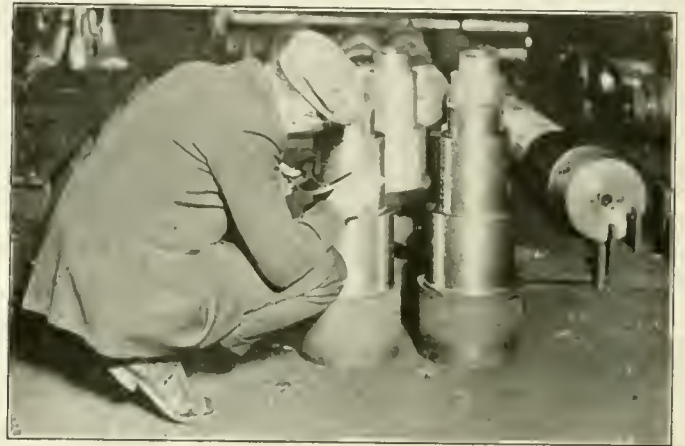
Crank Pins Are Calipered and the Dimensions Filled in on a Form.
